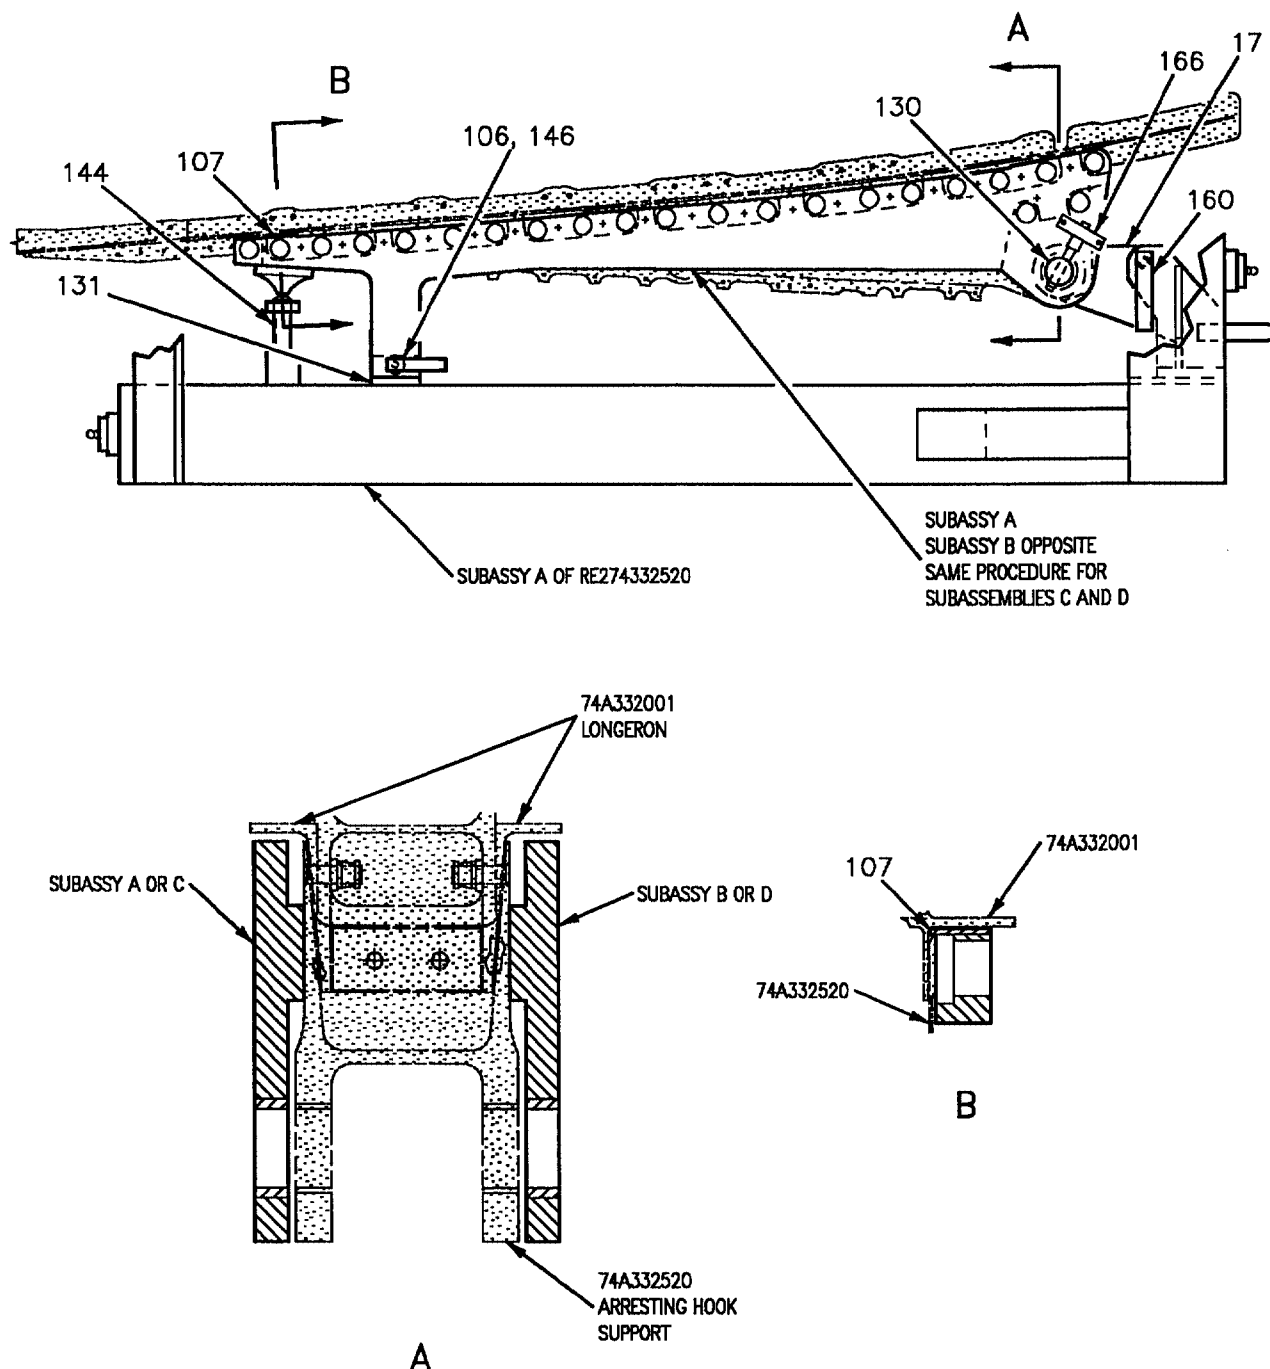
Hole Transfer Frame RE174332520-1 (Sheet 1)
